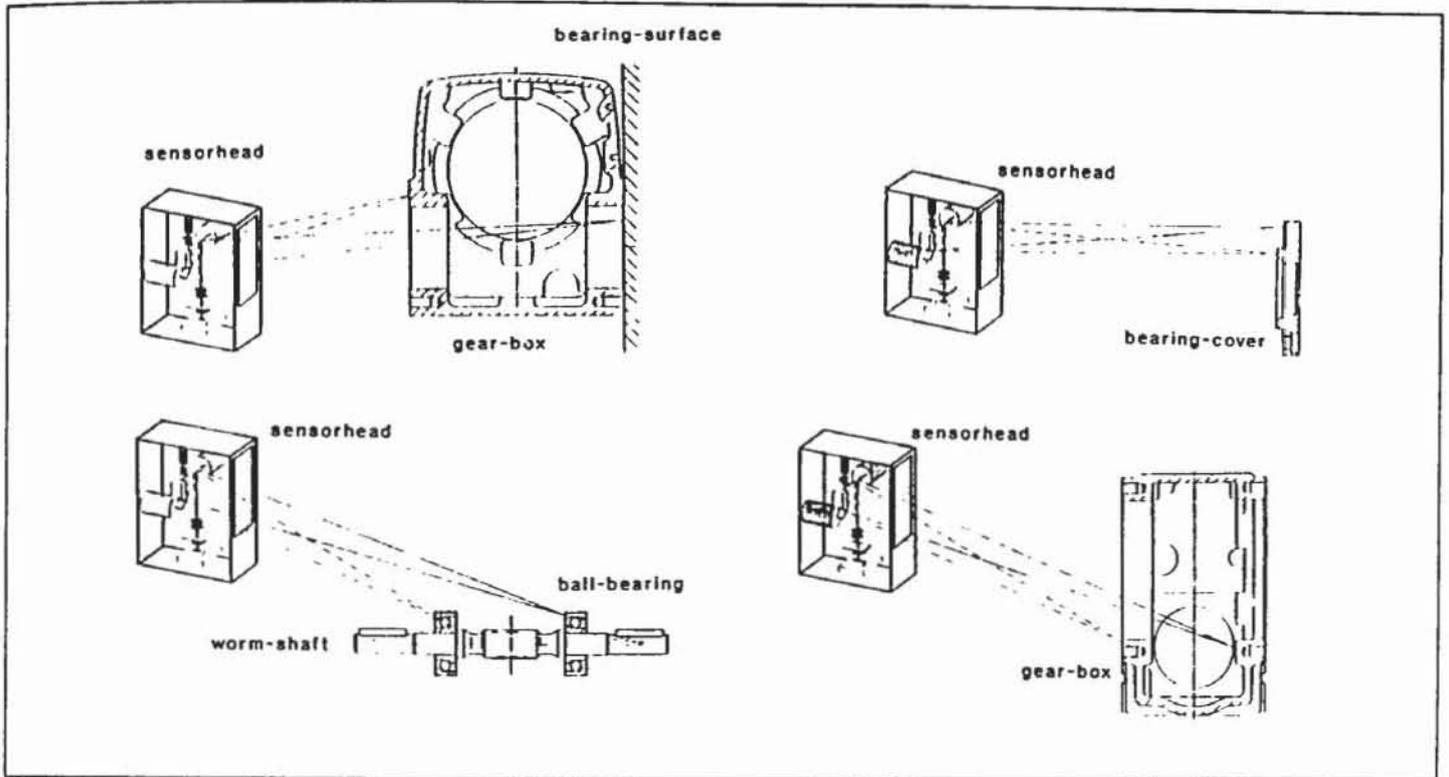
Application of the sensor system in the automated worm-gear assembly. Measurement of the components for the mounting procedure
